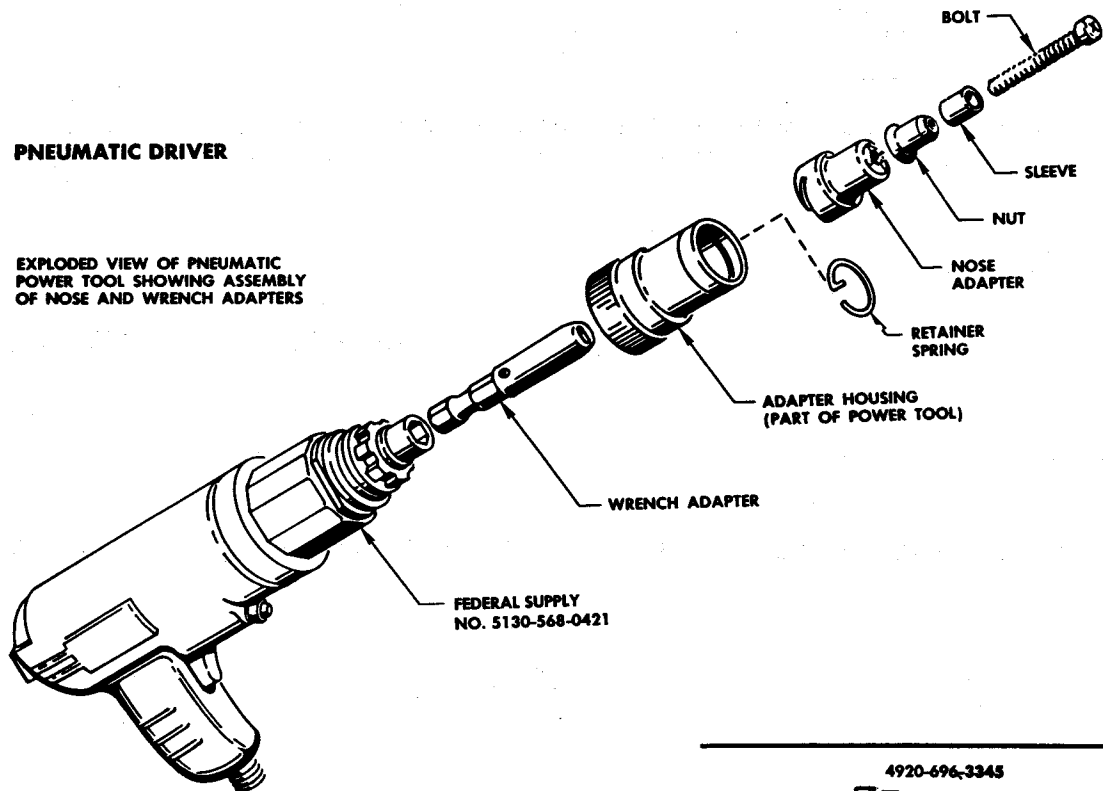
Installation of Jo-bolts (Sheet 1 of 3)
